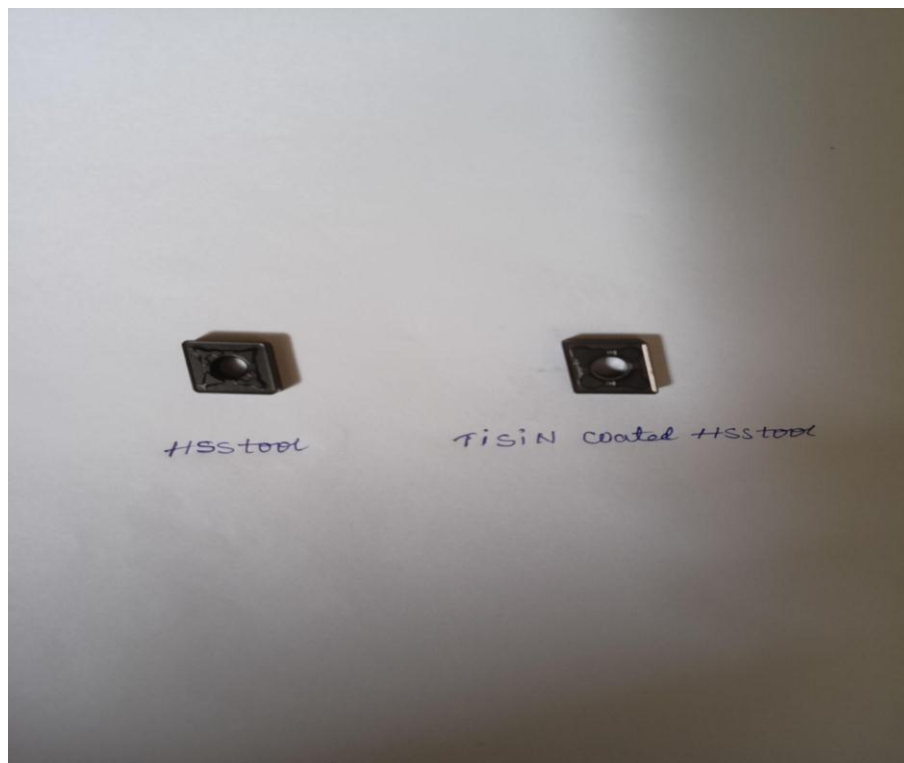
HSS Tool and TiSiN coated HSS Tool
